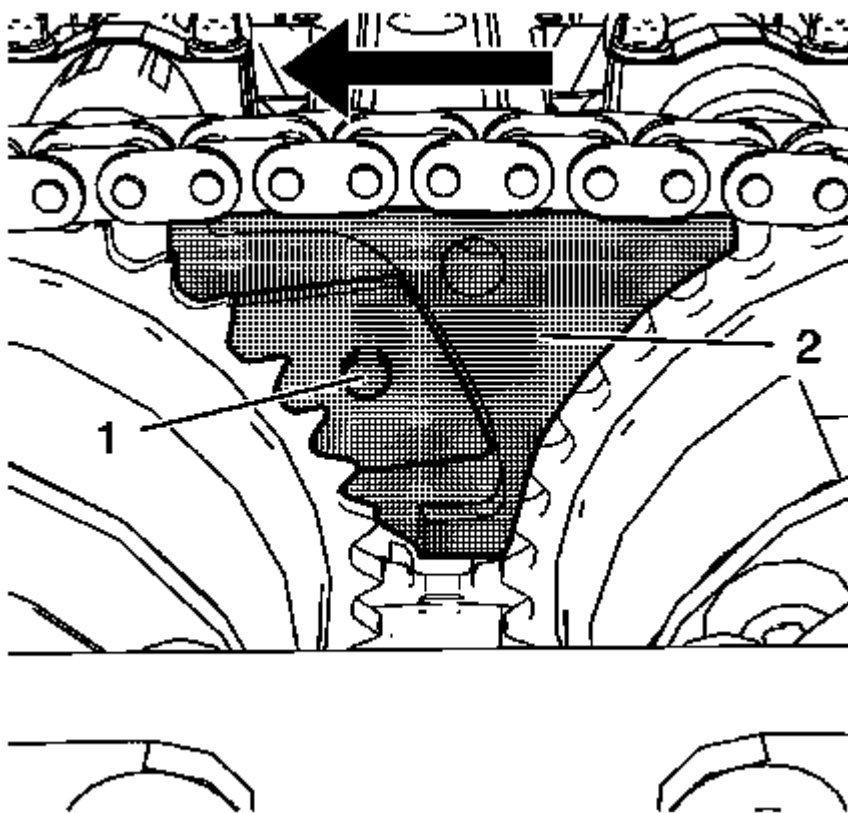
Intake Camshaft Sprocket Gearing And Special Tool
